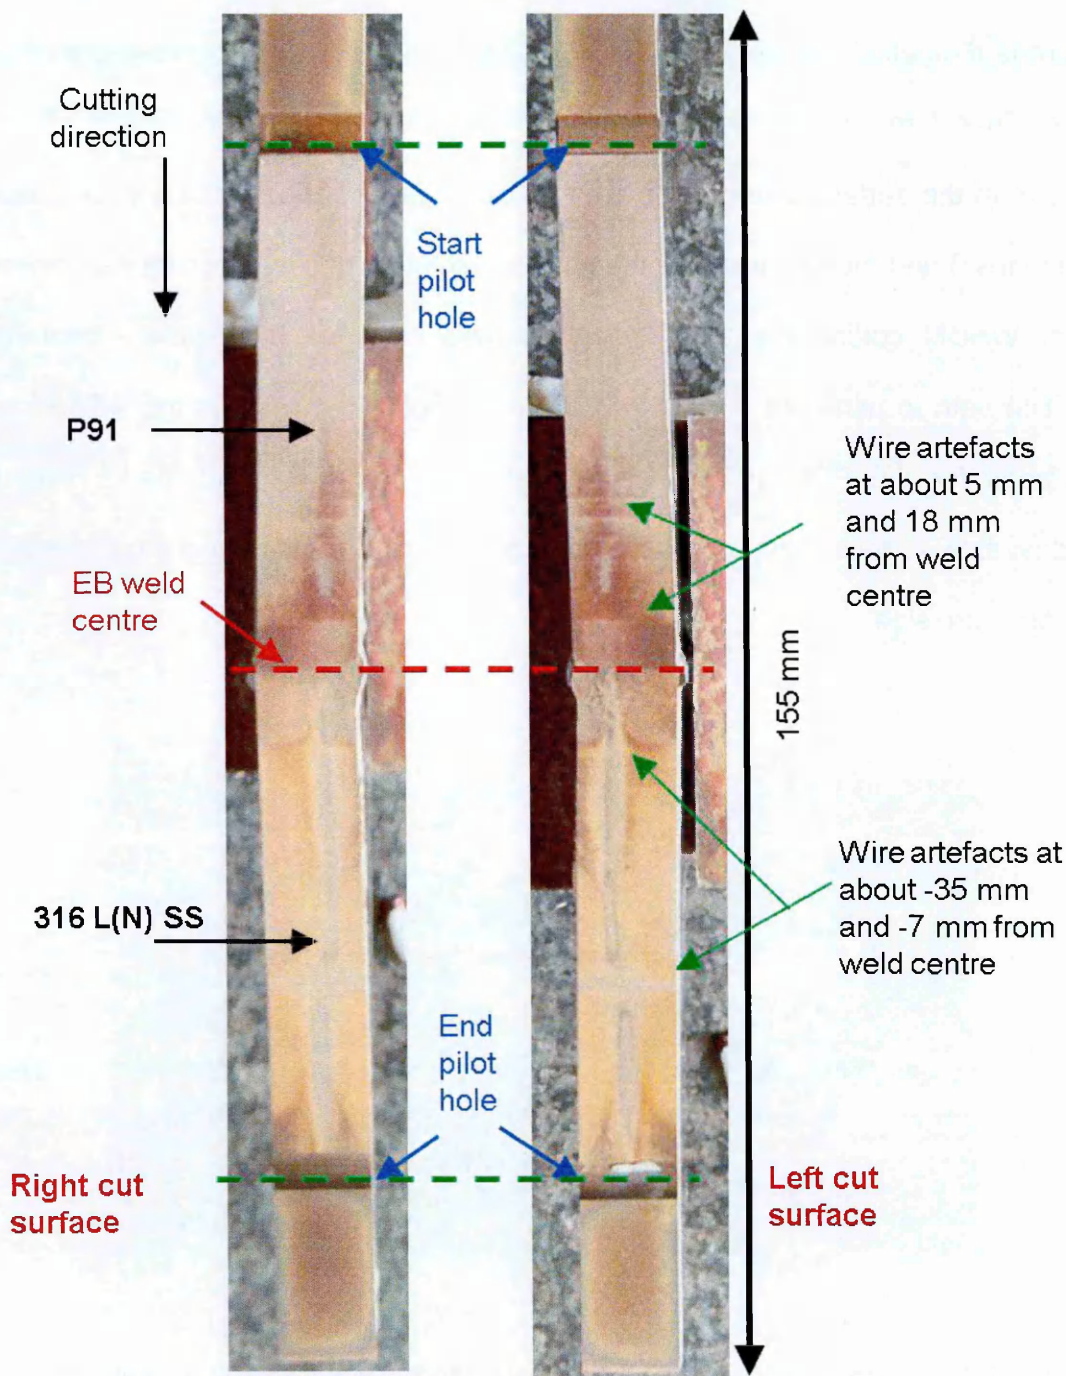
Photograph showing the WEDM cut surfaces for the P91:316SS electron beam welded plate.
